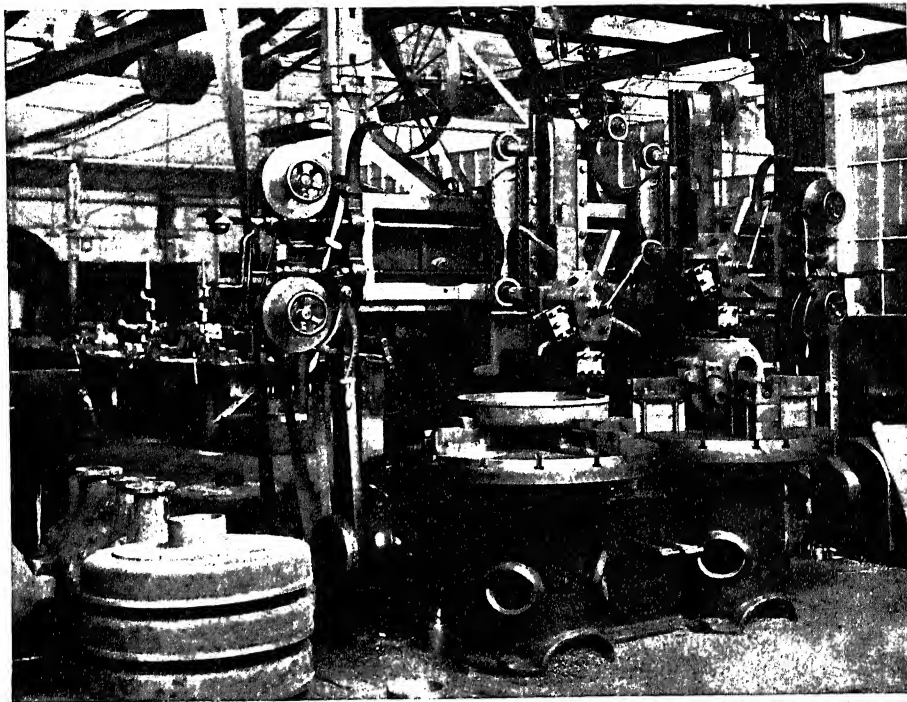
Two Distinct Pieces of Work being toolled on one Machine
